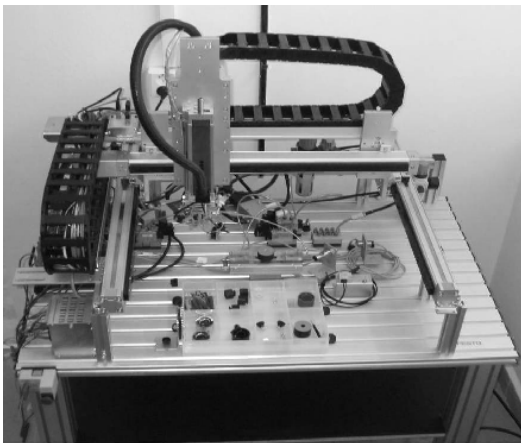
Model of Cartesian robot for assembly and disassembly process
